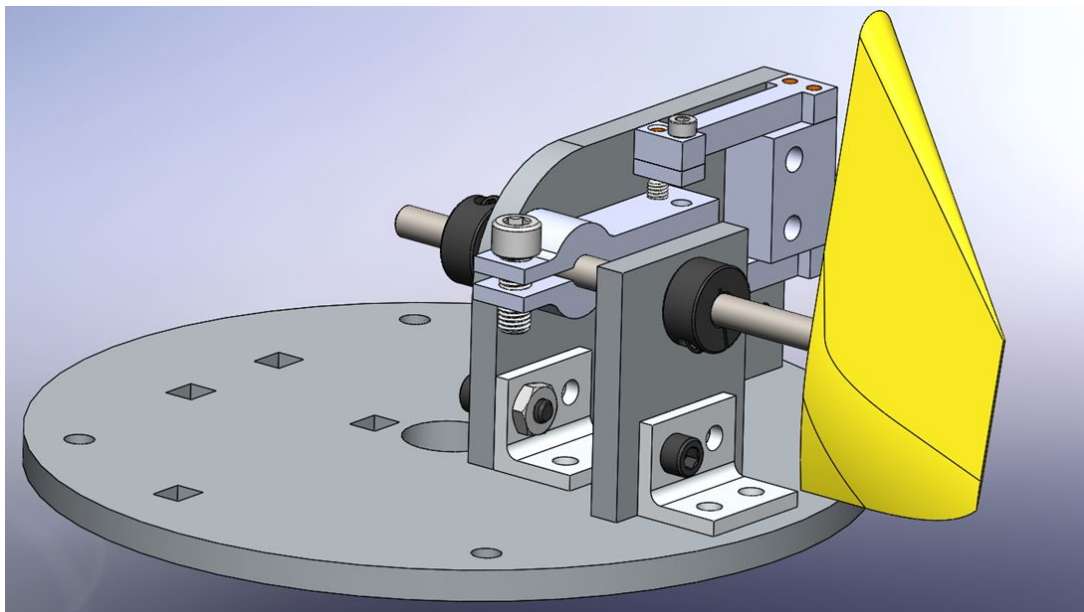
Assembly of one canard mounting mechanism in Solidworks, in isometric view
